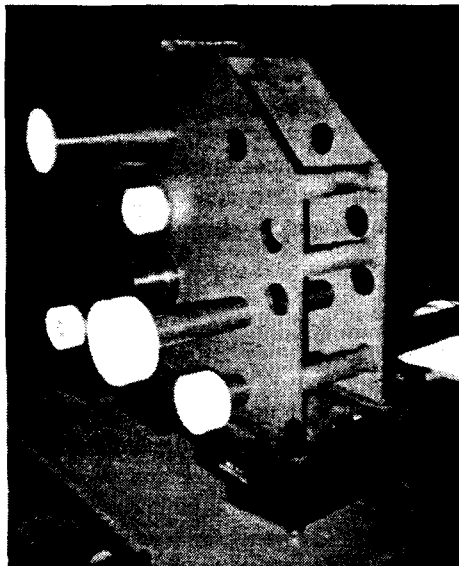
Closeup of the gage. Some of the sliding tubes and plastic end pieces have been installed in this view.
